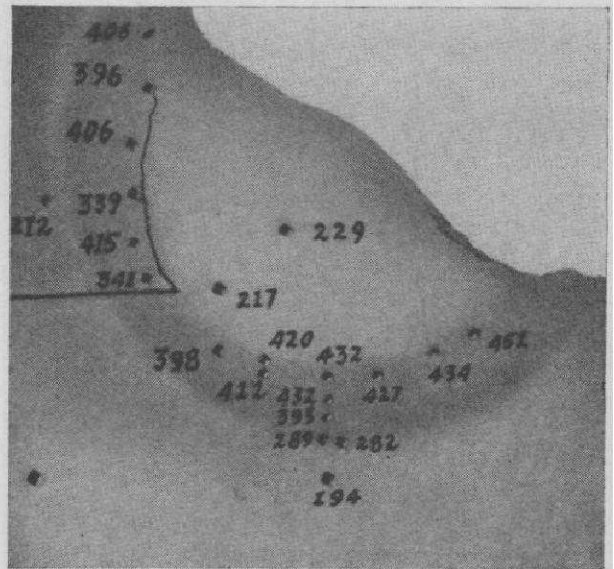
SECTION OF REEVE TEST ON TISCROM STEEL SHOWING WELD-CRACKING
